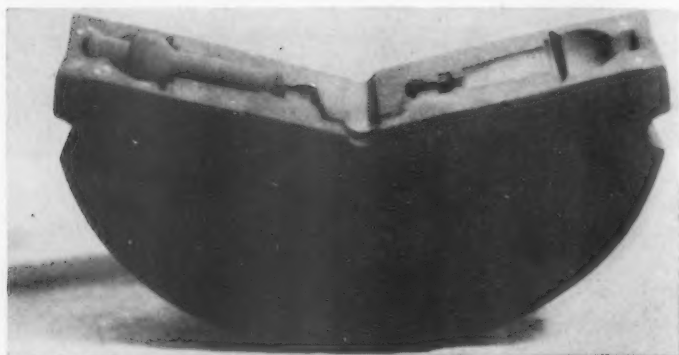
A SECTIONAL VIEW OF A BEARING CASTING COPE AND DRAG WITH A CENTER CORE SET AT LEFT.
